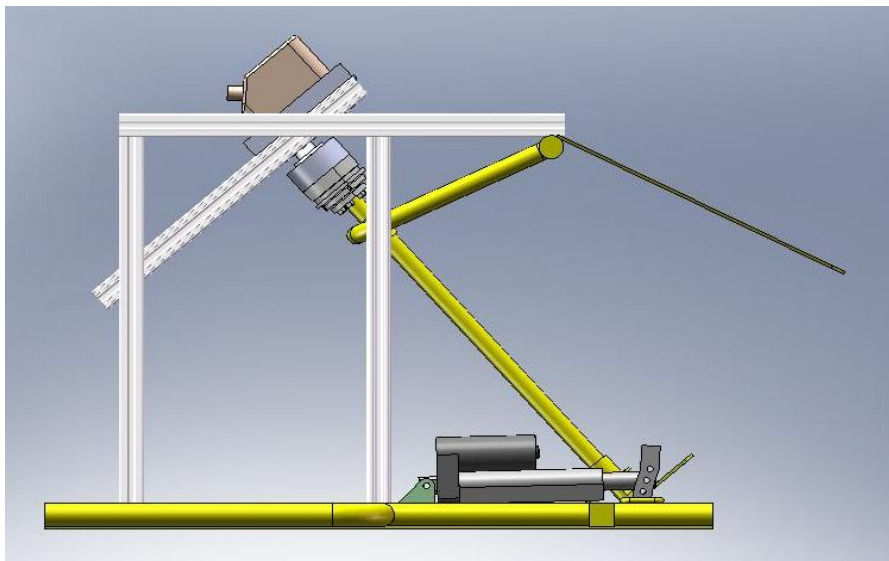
Right Side SolidWorks View of the Servo Mounting Frame
